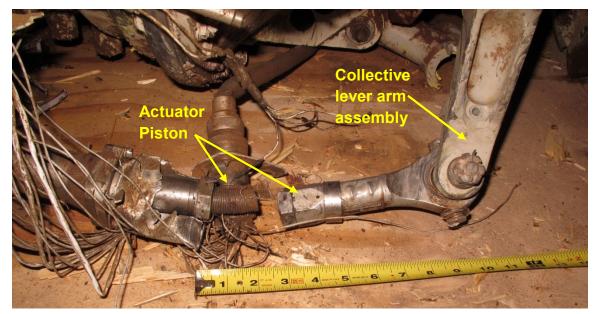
The fractured actuator piston attached to the lever arm assembly.
